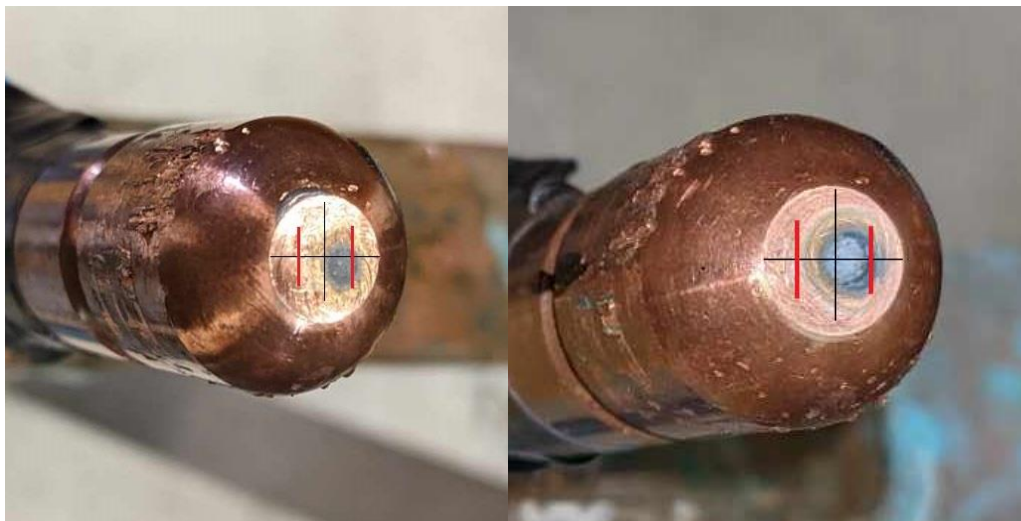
Flat cap geometry off-centered welds can be observed. The first 10 welds were performed using the left cap shown with an approximate 2 mm deviation from the center of the cap. The remaining last 10 welds are performed using the right cap provided with an approximate 1 mm deviation from the center scan. The imaging region is enclosed by the red lines provided in the cap images. It is observed that when weld misalignment is accounted for, the phased array data that is observed strongly agrees with the diameter of the nugget exposed in the imaging region.
